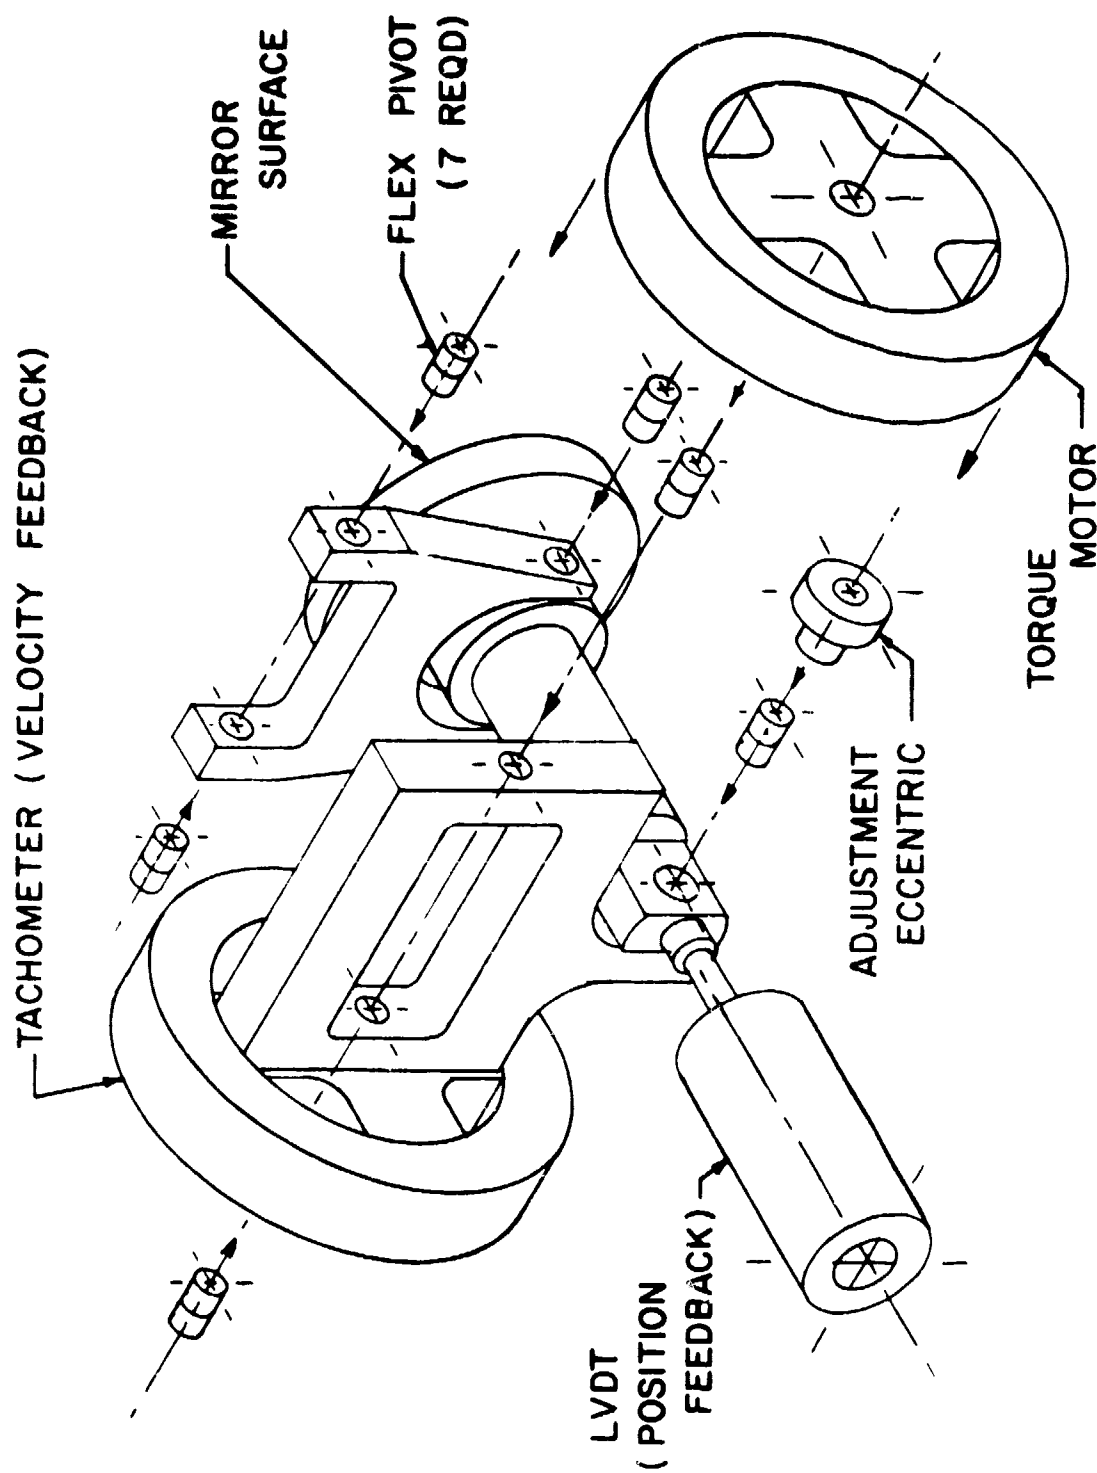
Detailed pictorial drawing of flex-pivot interferometer drive mechanism.
